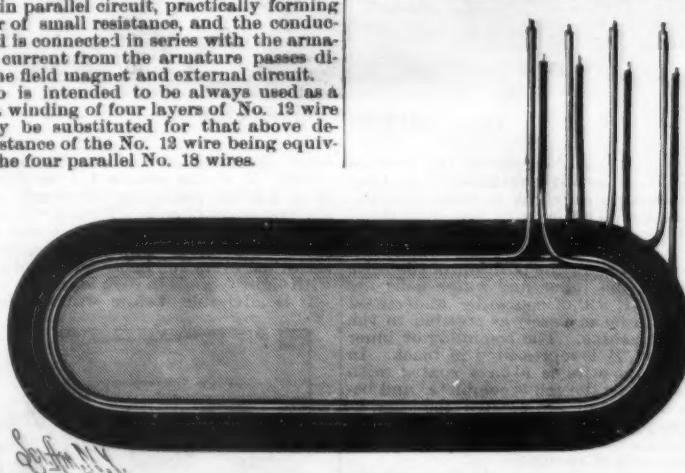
SECTION OF ONE ARM OF THE FIELD MAGNET, SHOWING WINDING.
